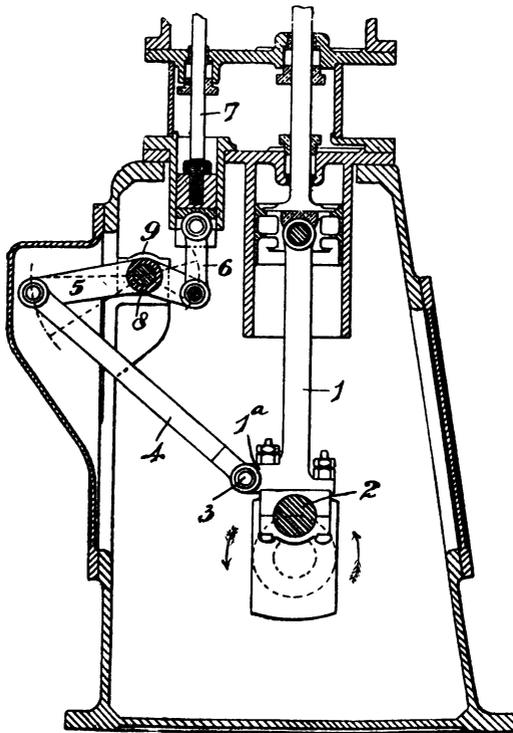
VIEW SHOWING VALVE GEAR OF THE “CHANDLER” ENGINE.
